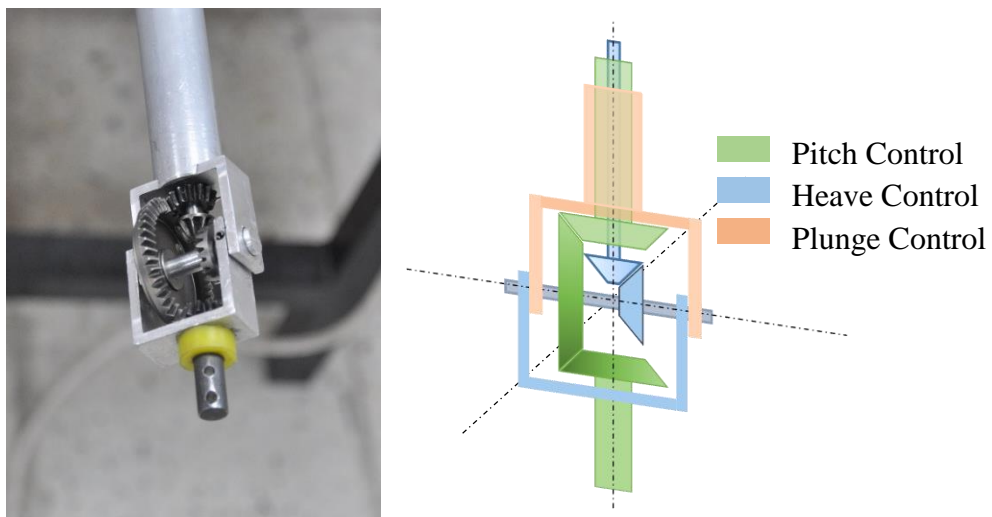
Mechanical wrist and gear box assembly (left) with illustrated explanation of gear and rotation axes assignment (right)
